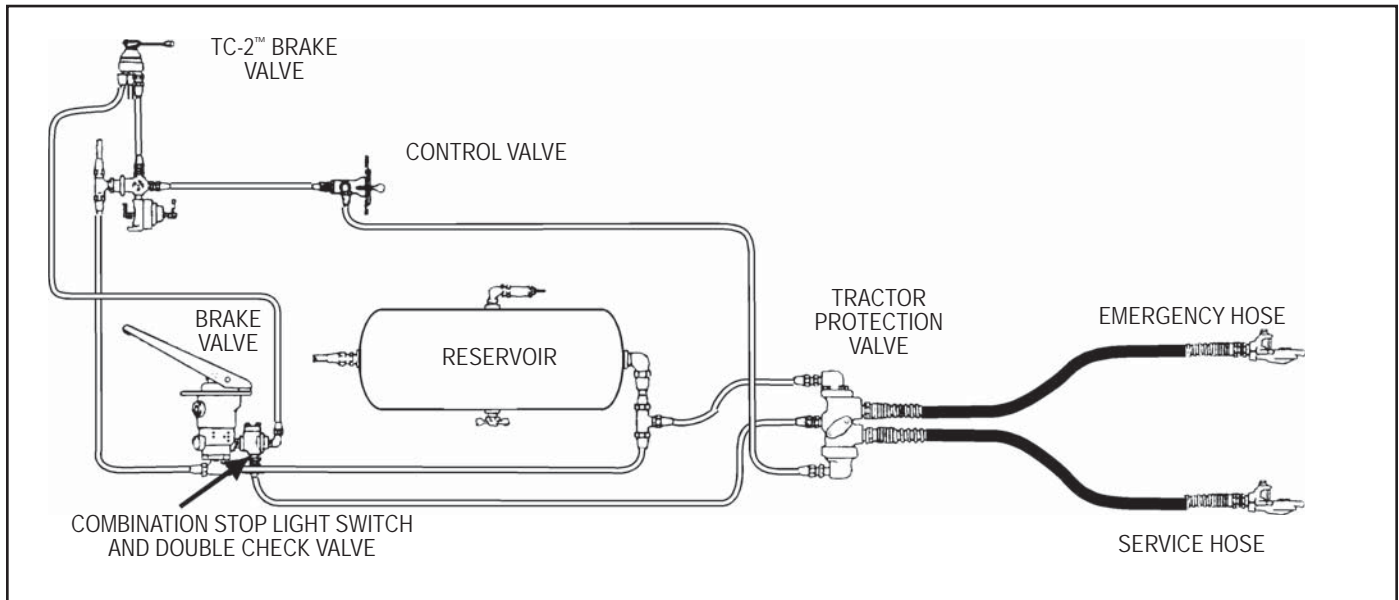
TC-2™ TRAILER CONTROL BRAKE VALVE TYPICAL PIPING DIAGRAM
